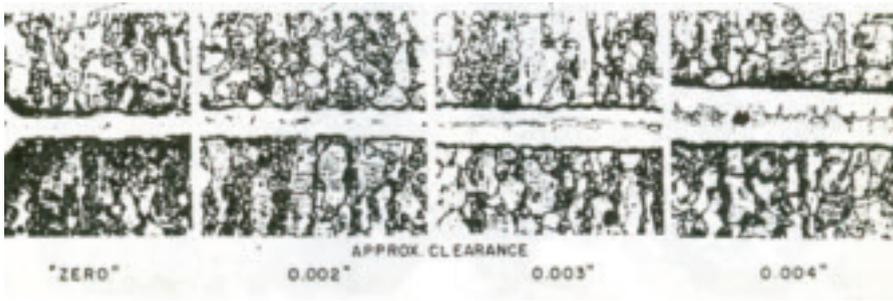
For proper nickel-brazed joint clearances, clearances at brazing temperature should be kept below about 0.003 in. (0.075 mm).
